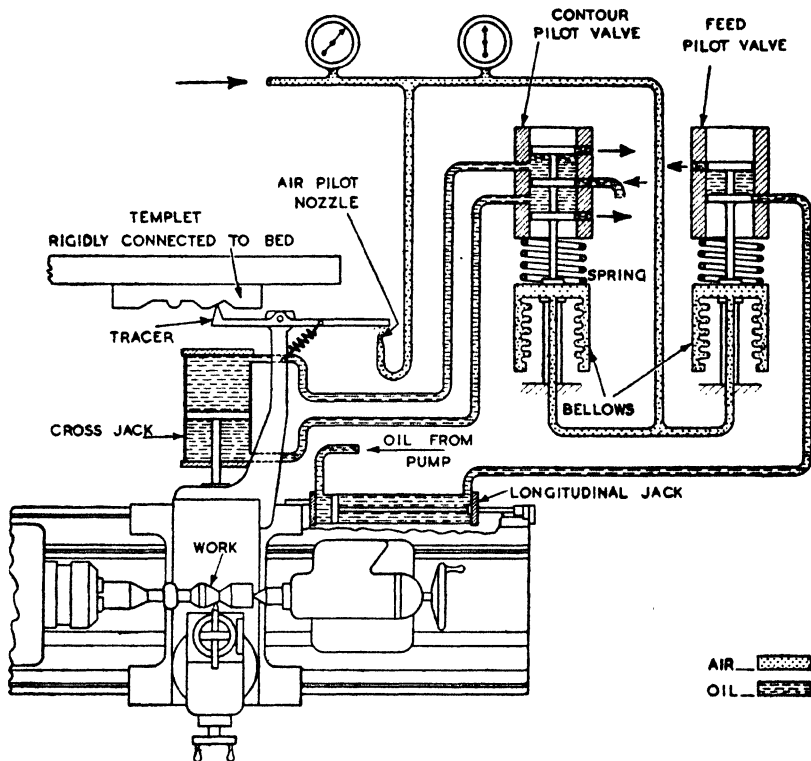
HYDRO-PNEUMATIC MACHINE TOOL COPYING SERVO
